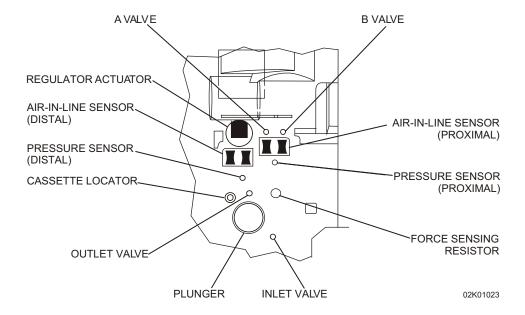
Mechanism Valve Pins and Sensor Locations
